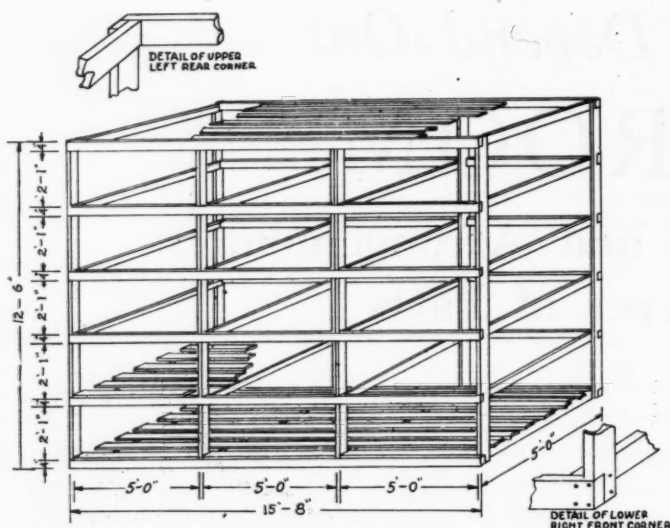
This is a good rack for binning sheet metal parts, as they require protection of finished surfaces
